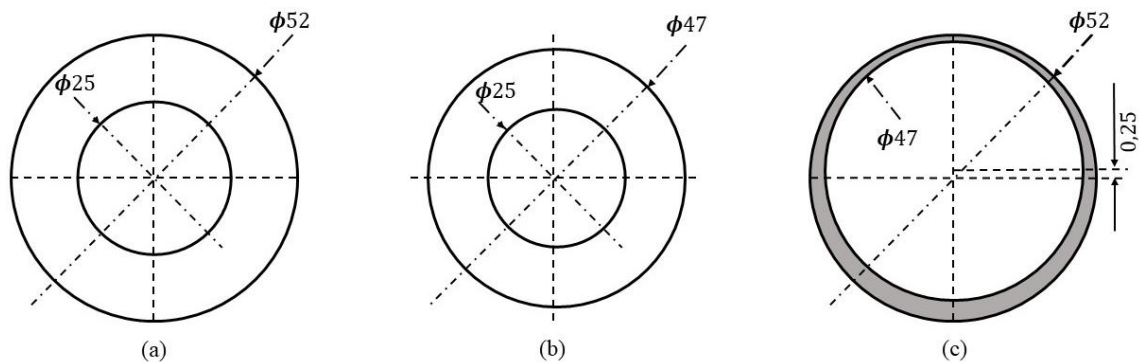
Bearing shapes used in the creation of the EF (a) IM original bearing; (b) New bearing; (c) Baga.
